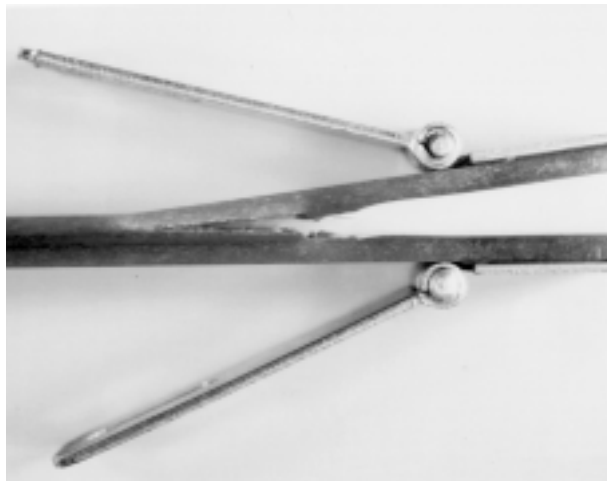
Flexure failure of the substrate during mode I fracture tests of SRIM composites with traditional DCB geometry.
